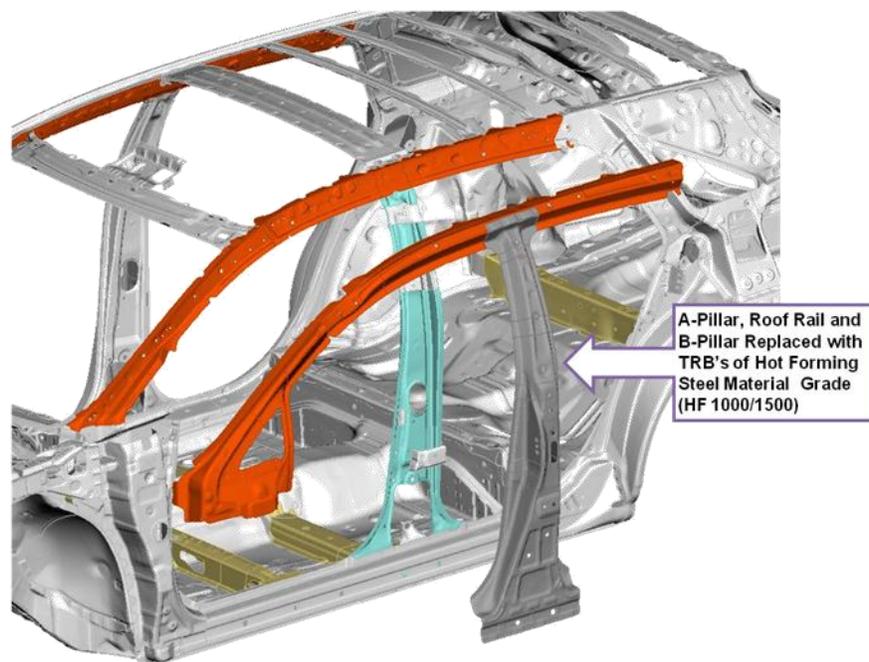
Body Side Parts Replaced with TRB Parts
